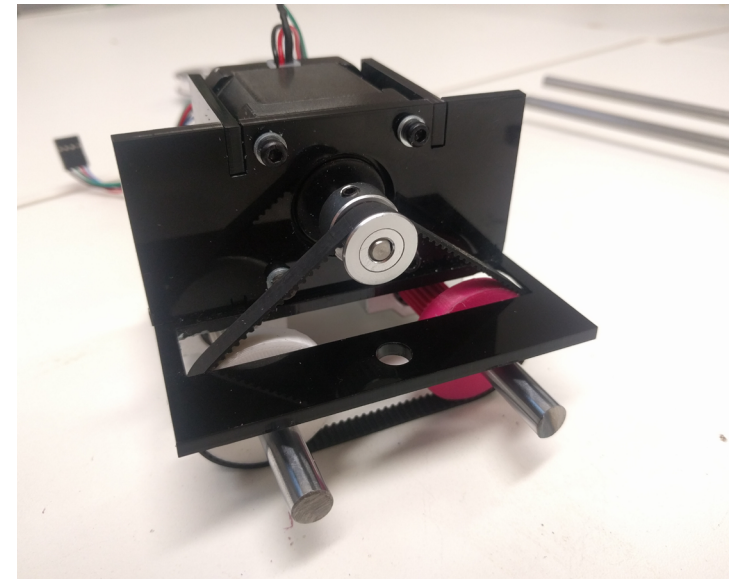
3D printed parts adjustement... and assembling process for Y axis module
